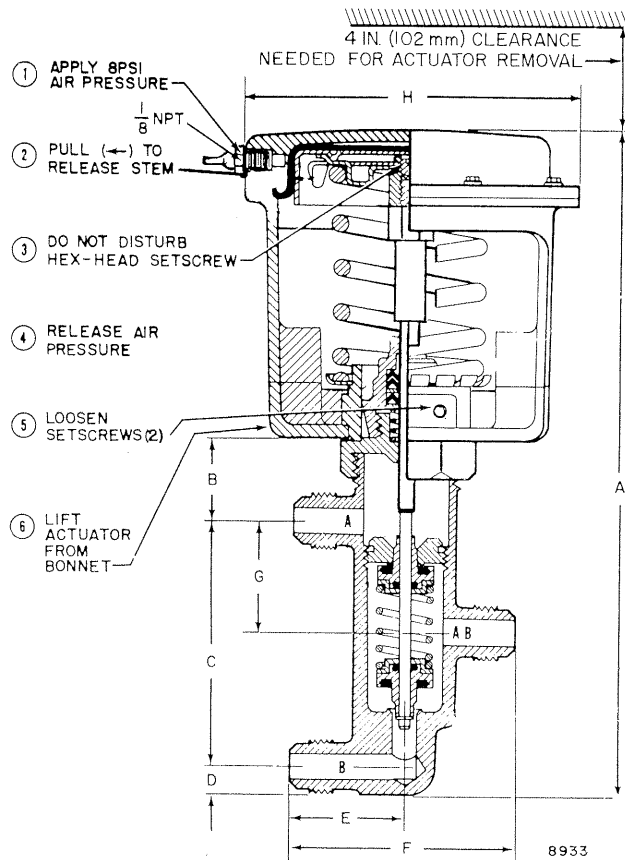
VP522 Approximate Dimensions in Inches (Millimeters). See Table 1.
